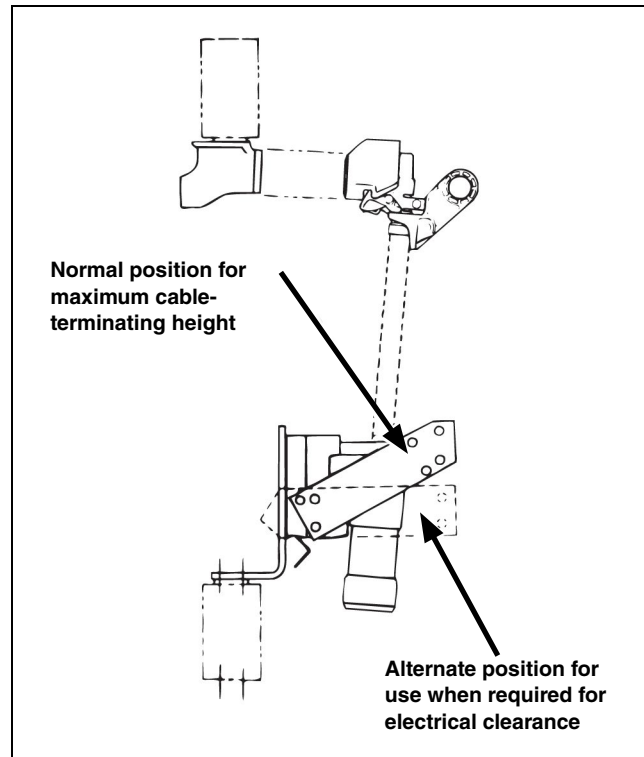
Fuse assembly showing alternate arrangement of two-position cable-terminator adapters.
